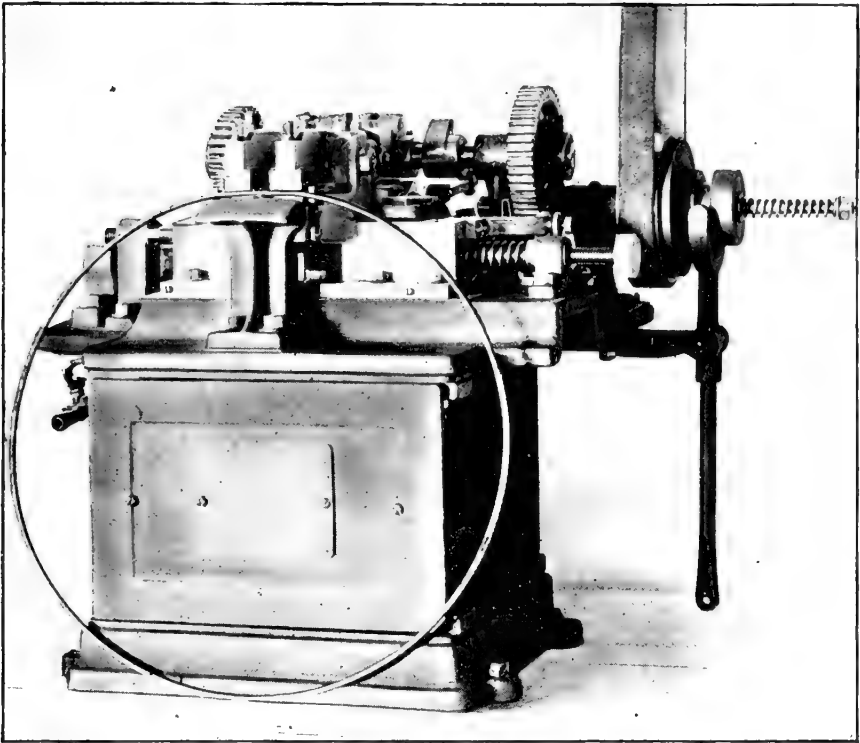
AN ELECTRIC TIRE-WELDING MACHINE, MADE BY THE THOMSON ELECTRIC WELDING COMPANY, LYNN, MASS.
